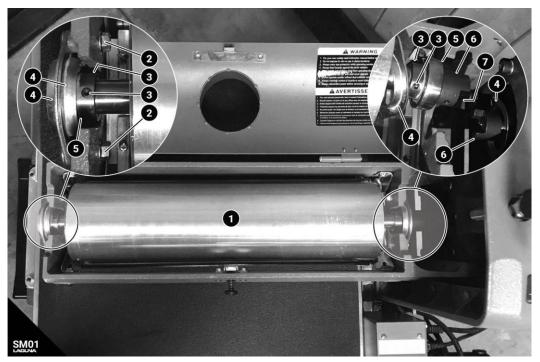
Drum Head Assembly Installation/Removal. #'s (1) Drum Head. (2) Mounting Bolts/Nuts. (3)
